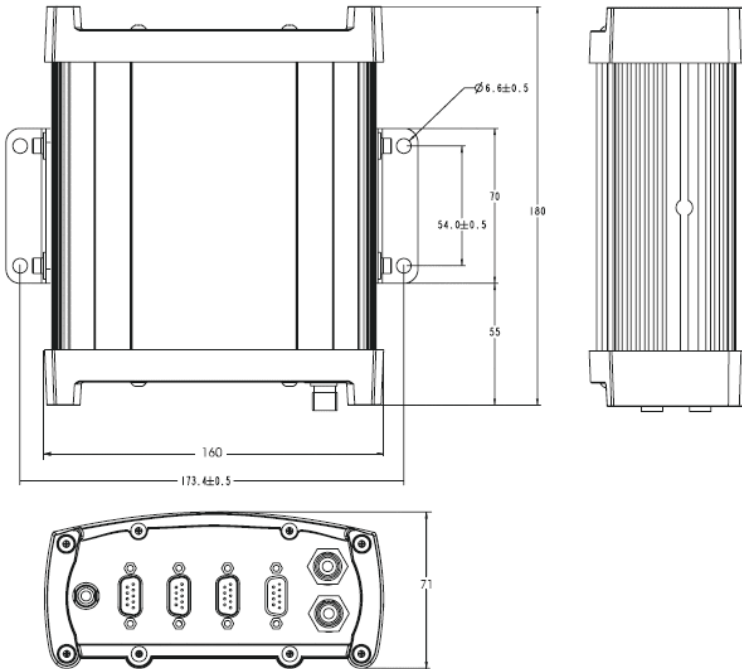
8305HP Dimensions (all dimensions are in millimetres).
